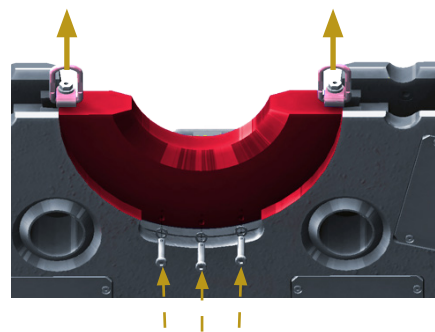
Fasten Guide Plate with Mounting Bolts and Washers; Unscrew Hoisting Eyes
